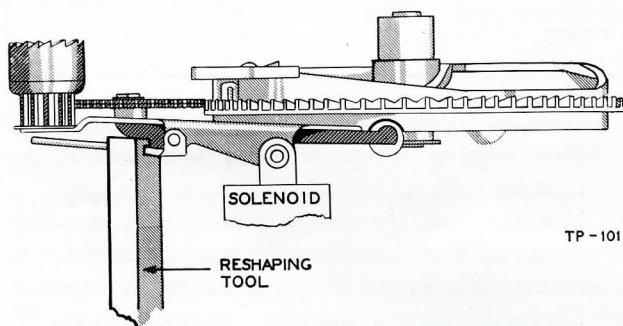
RESHAPING CLUTCH-LEVER ASSEMBLY
